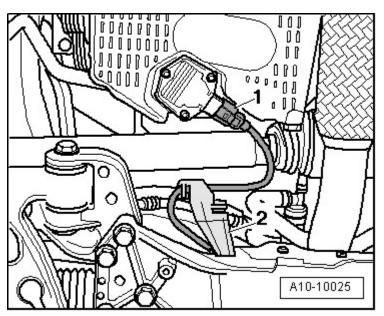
Identifying Pendulum Support & Bolts Courtesy of AUDI OF AMERICA, LLC
